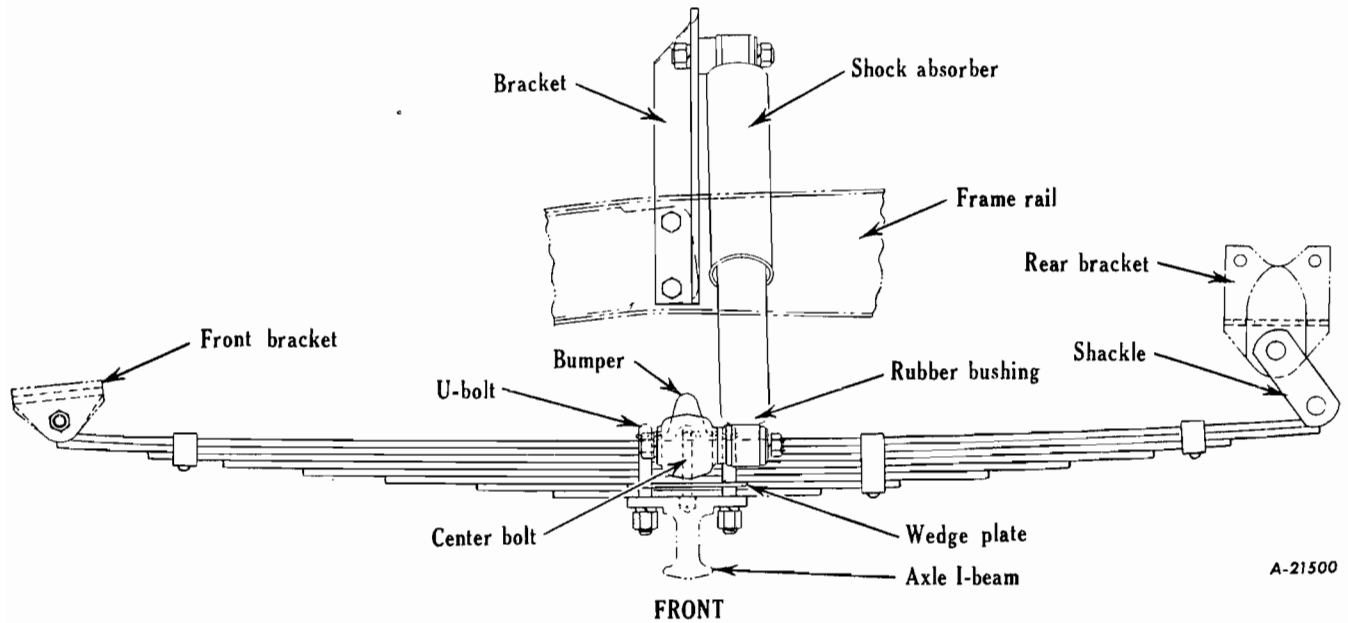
Models L-110, L-120, LM-120, L-130, LB-140, LM-150.
